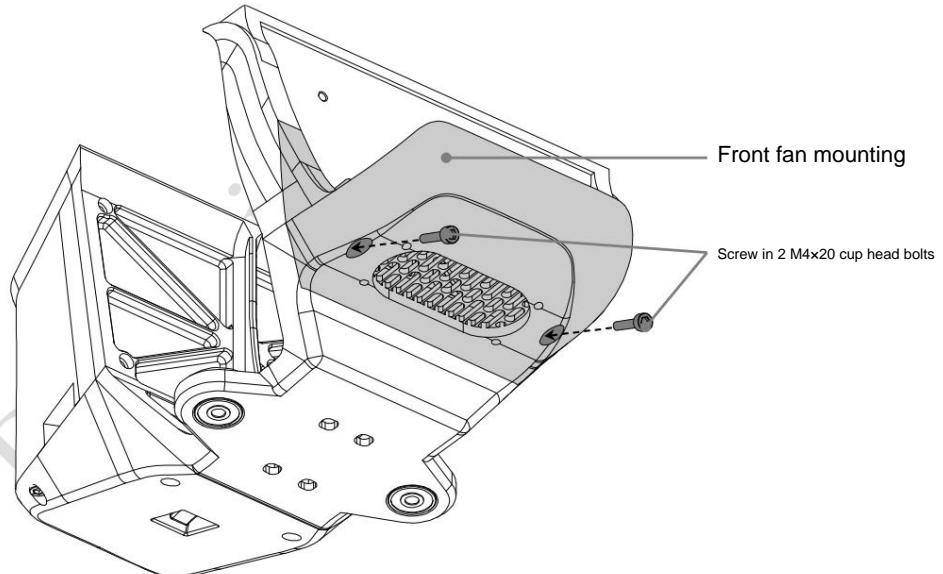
Installation diagram of the fan mounting parts at the front of the machine body
